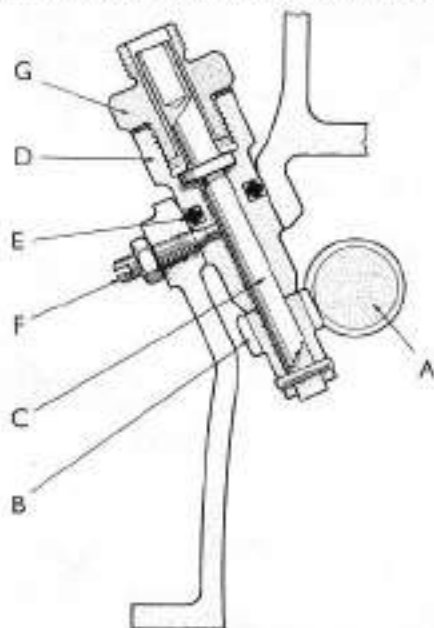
Cross-sectional view of engine speed indicator drive assembly for three-cylinder engines. Set screw (F) must be removed and the assembly withdrawn from crankcase to permit camshaft removal.
